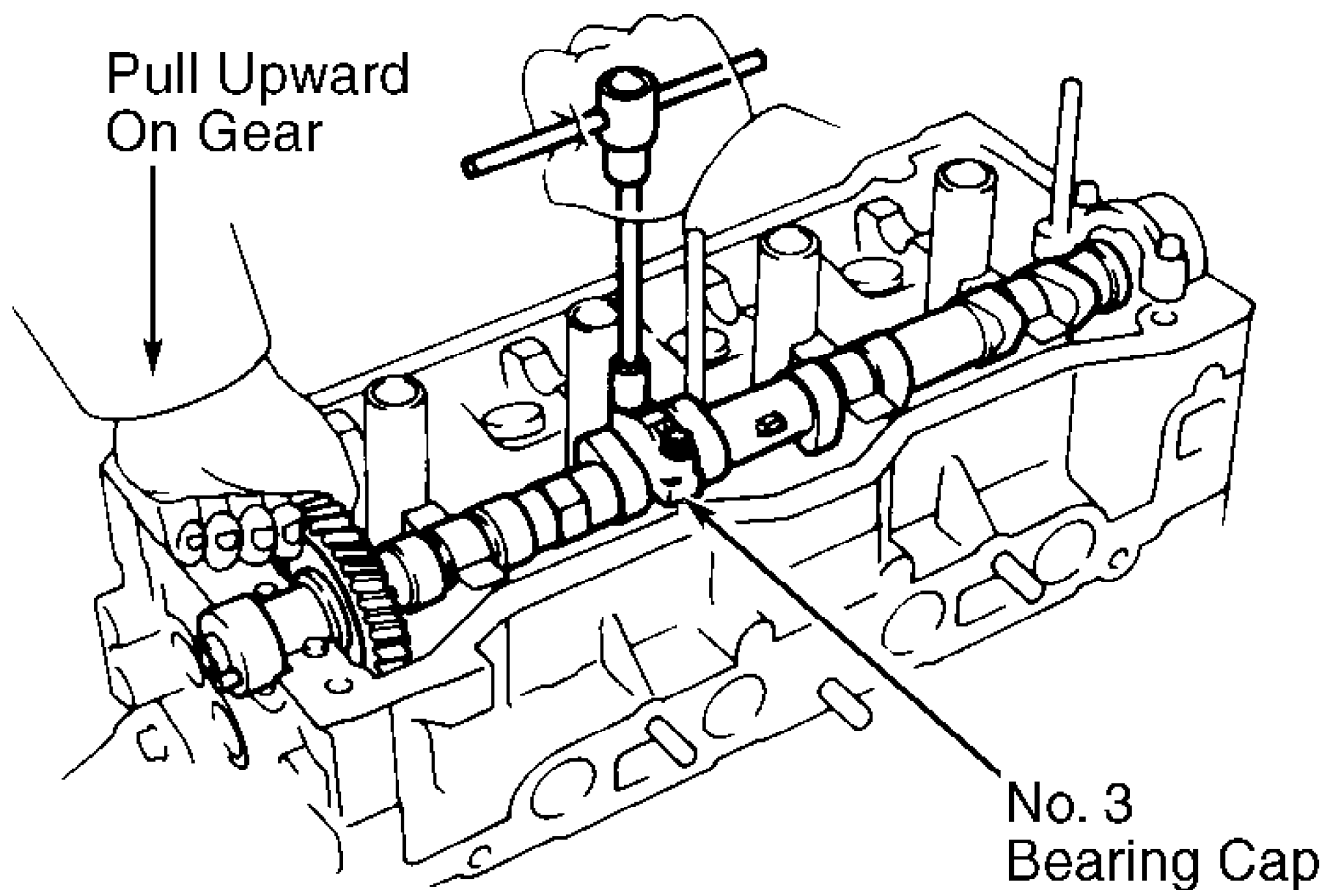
Exhaust Camshaft Bearing Cap Bolt Loosening Sequence
